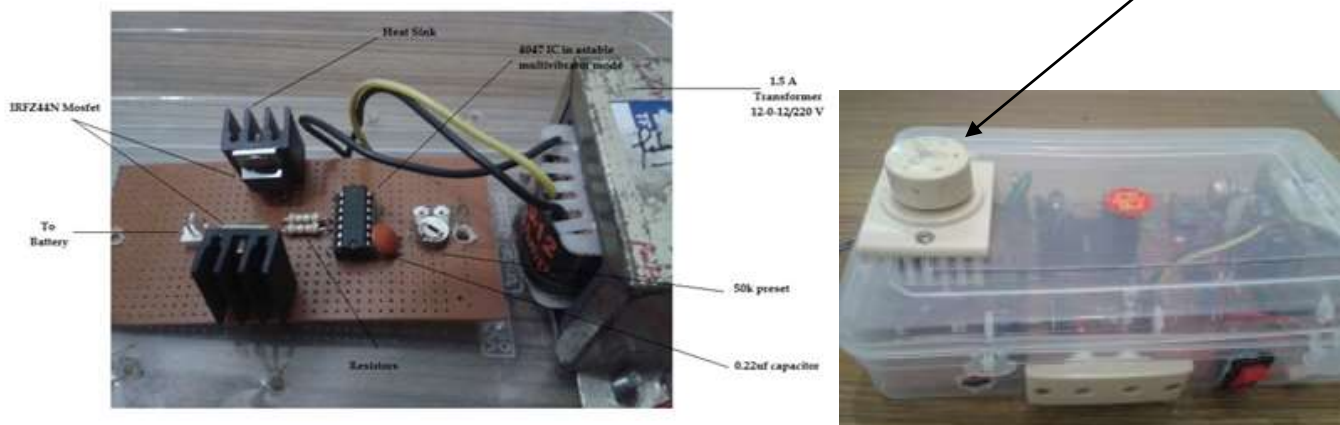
PCB fabrication of Inverter circuit and dimmer switch used
